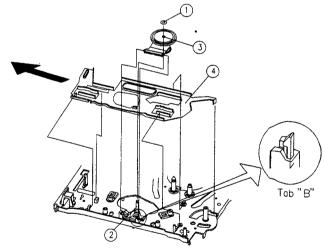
REEL GEAR TOTAL ASS'Y & CONNECT PLATE REMOVAL
